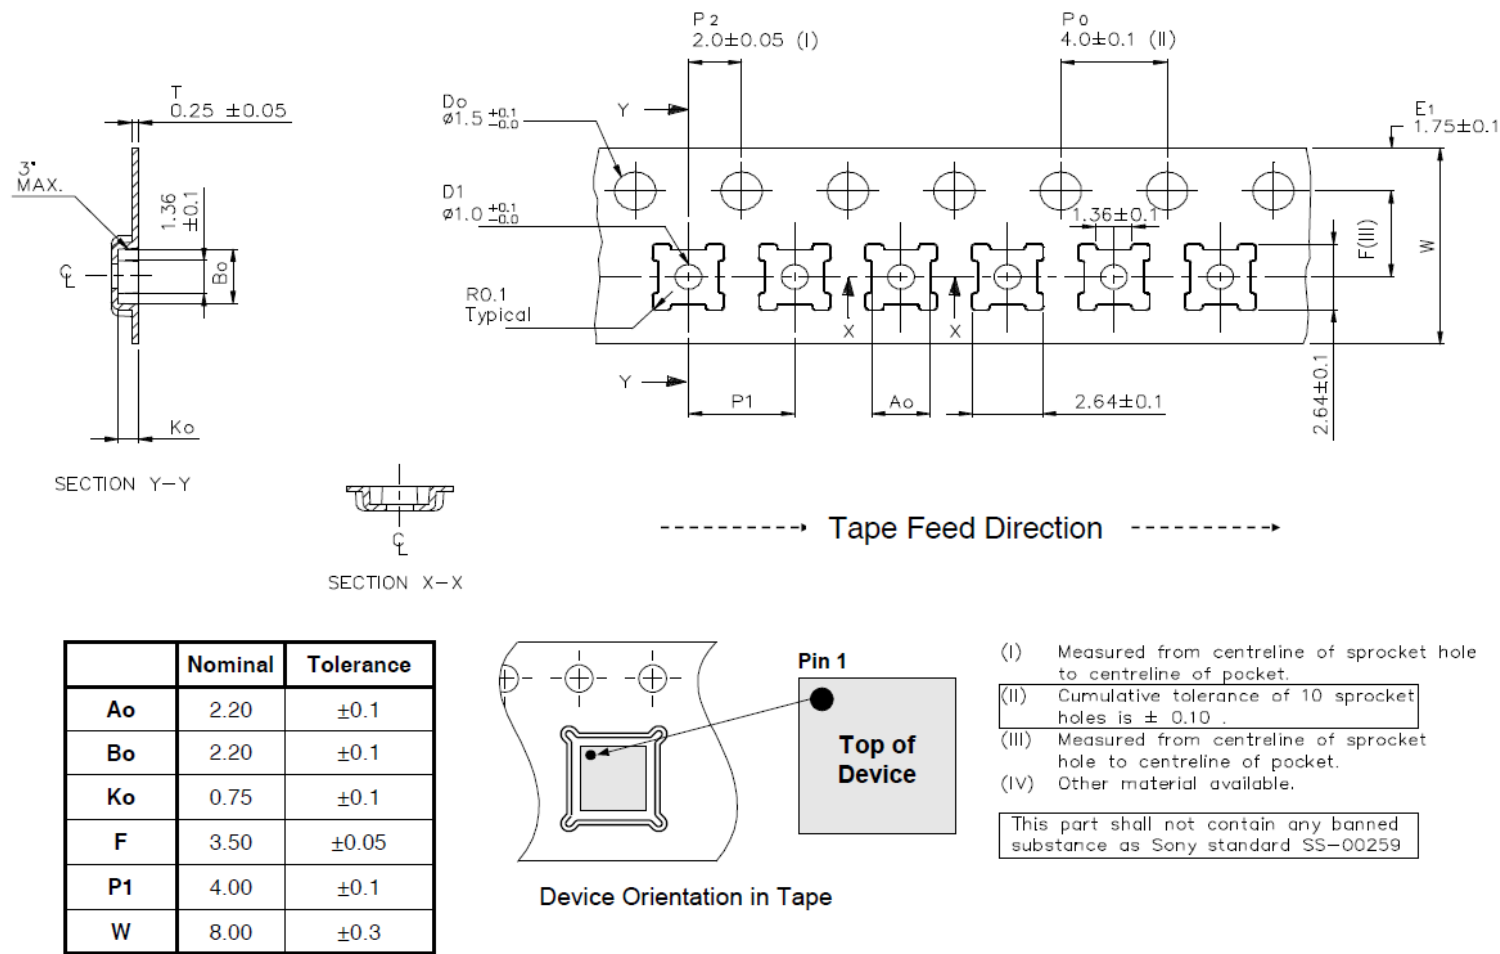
Tape and reel specification for the 12-lead 2 × 2 mm QFN package
